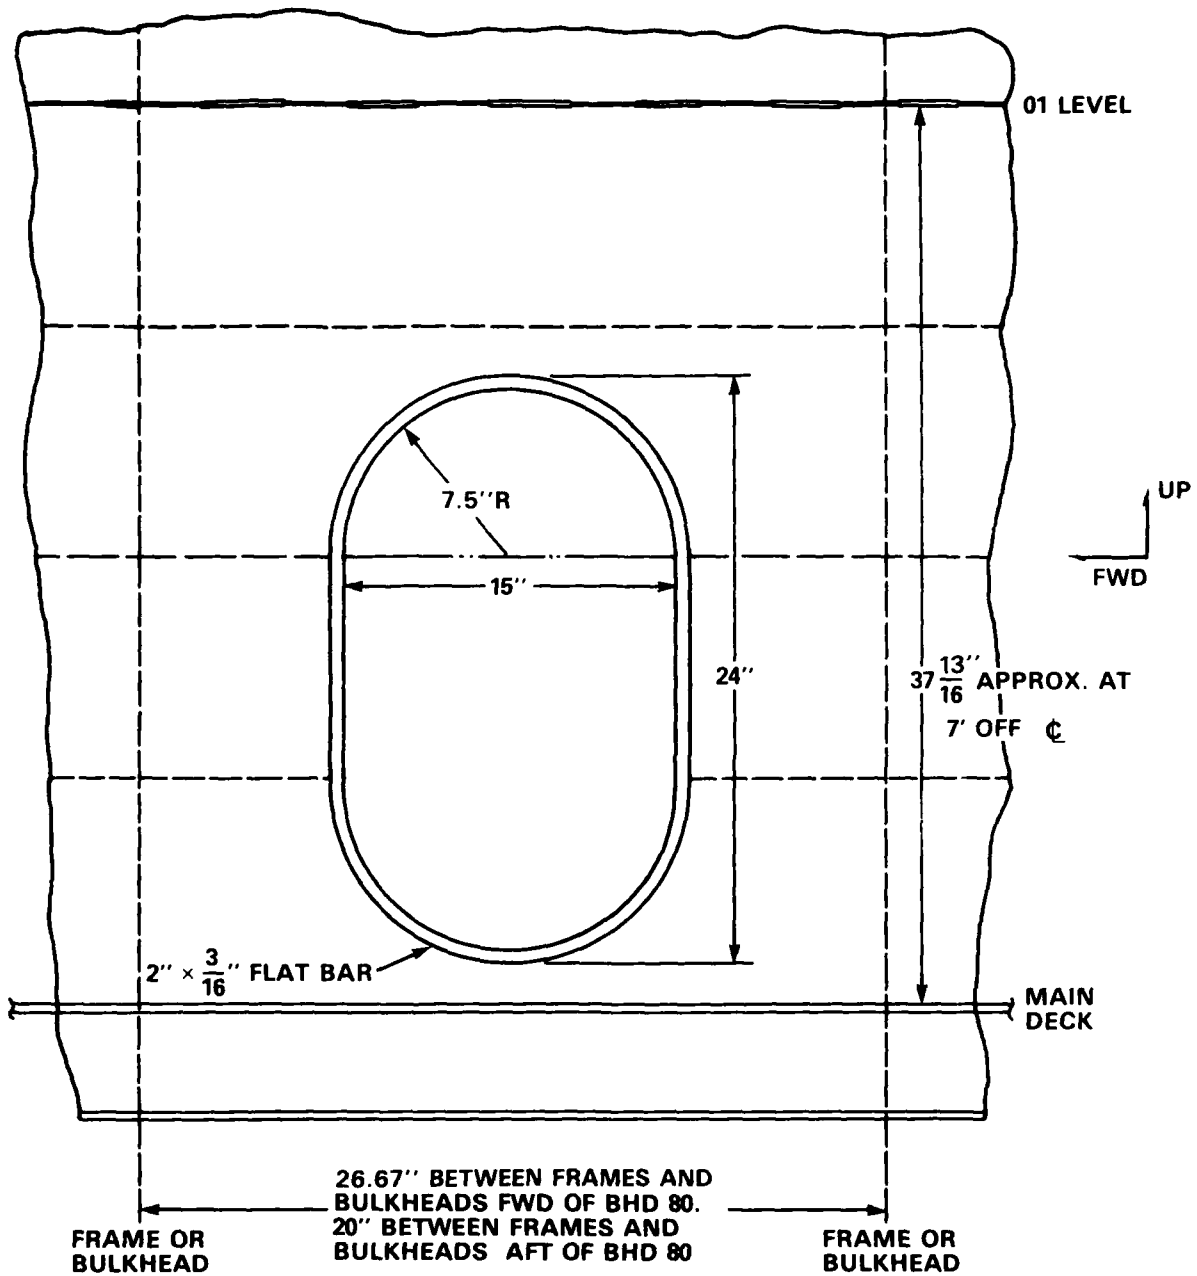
Typical Deckhouse Side Access Hatch Opening
